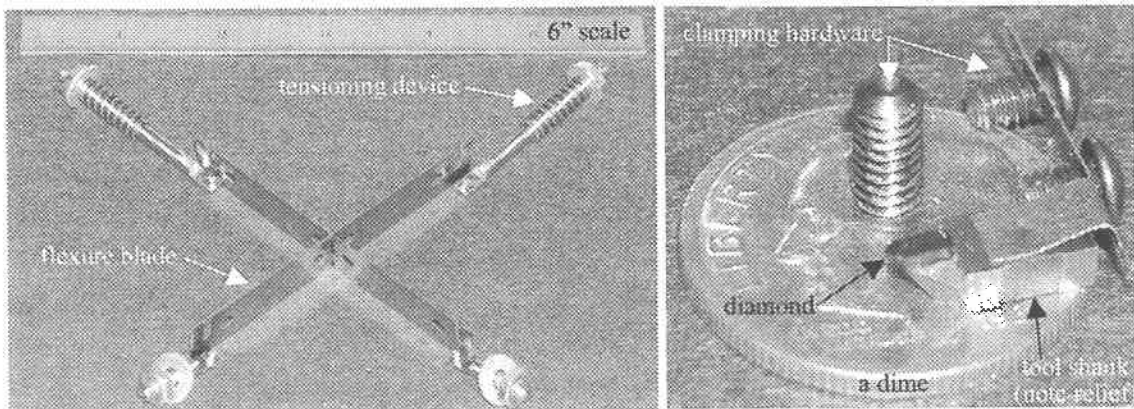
Four flexure blades and tensioning devices (left), and diamond tool with clamping hardware (right).
